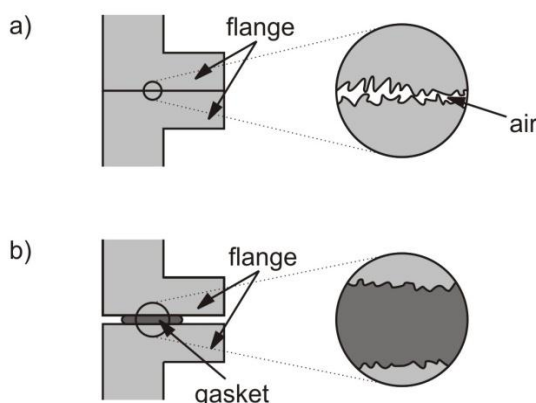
Seal cross-section: (a) without gasket – not tight; (b) with inserted gasket – leak-tight joint
